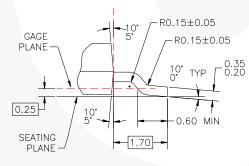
MOLDED PACKAGE, SUPERSOT, 3-LEAD
